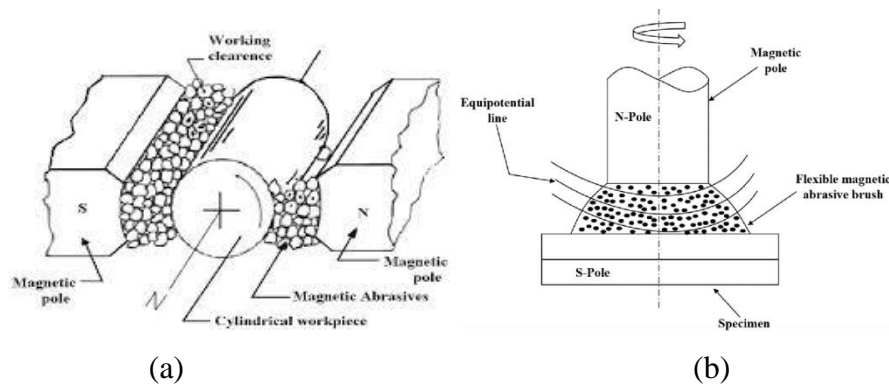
(a)MAF for Cylindrical Surfaces and (b) Flat surfaces
